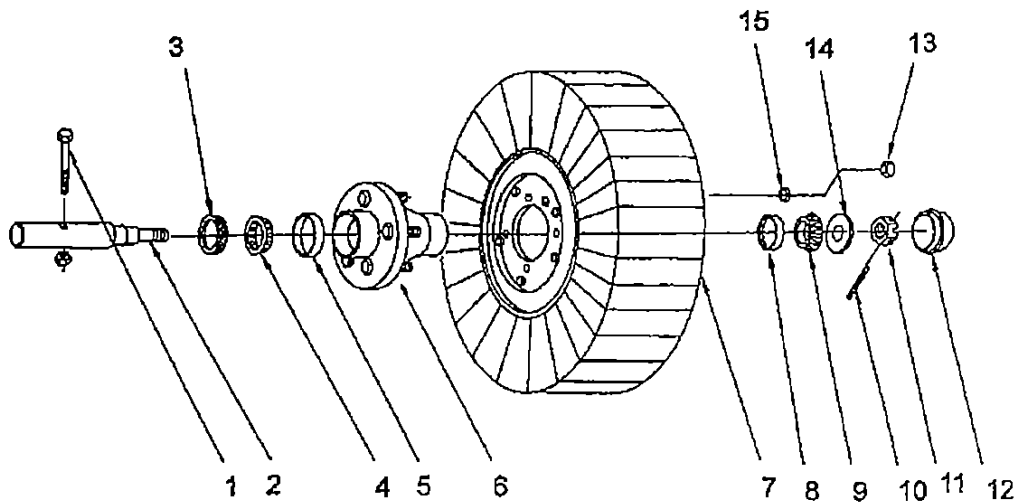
LAMINATED WHEEL COMPONENTS
